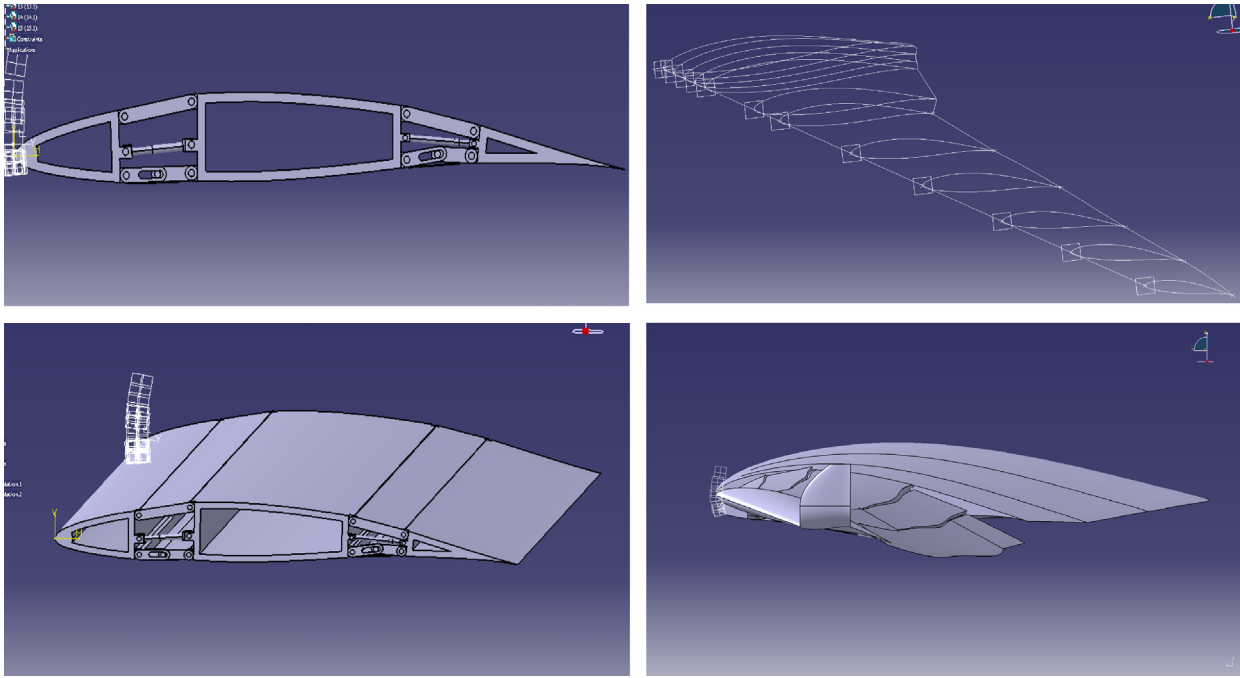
(a) Change forms adaptive lifting surfaces, (b) design the characteristic airfoil sections for forming adaptive wind turbine blade, (c) segment of adaptive wind turbine blade, (d) adaptronic lifting surface of wind turbine blade.
